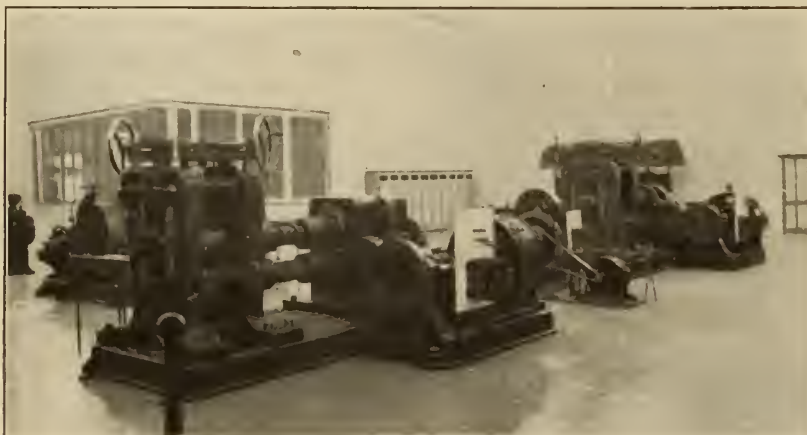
Rolling Mills ; Fillet Annealing Furnaces on Right.
